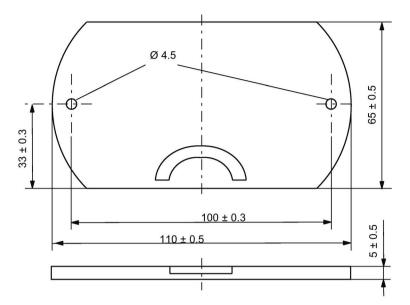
Dimension drawing of fixing pocket 6GT2390-0AA00
